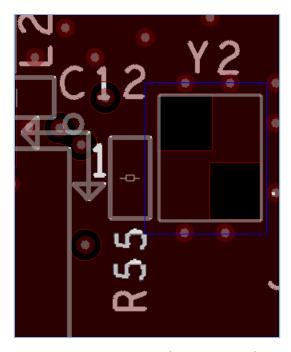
Openings on PCB pad for clock crystal of BGA83
